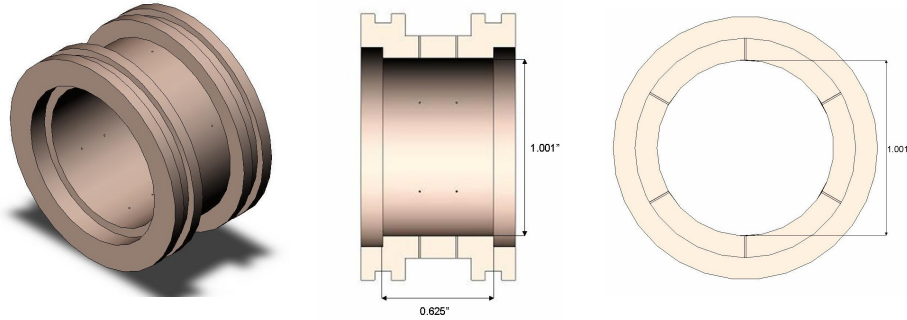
View of aerostatic bearing (3d, side and front cross sections)
